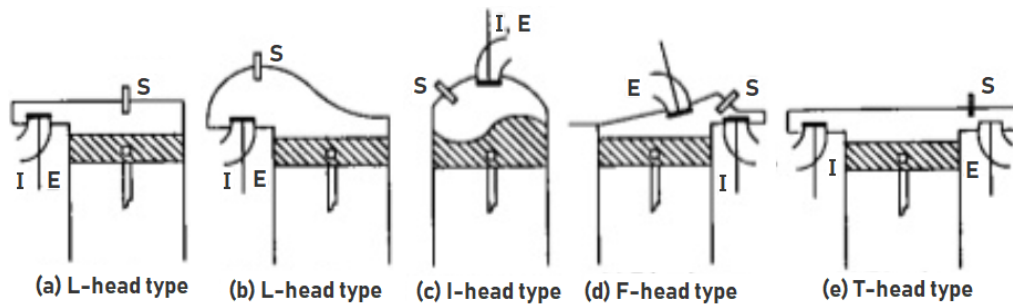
Combustion chamber for SI engines. Adapted from [6]. E- Exhaust valve; I- Inlet valve; S- Spark plug.
